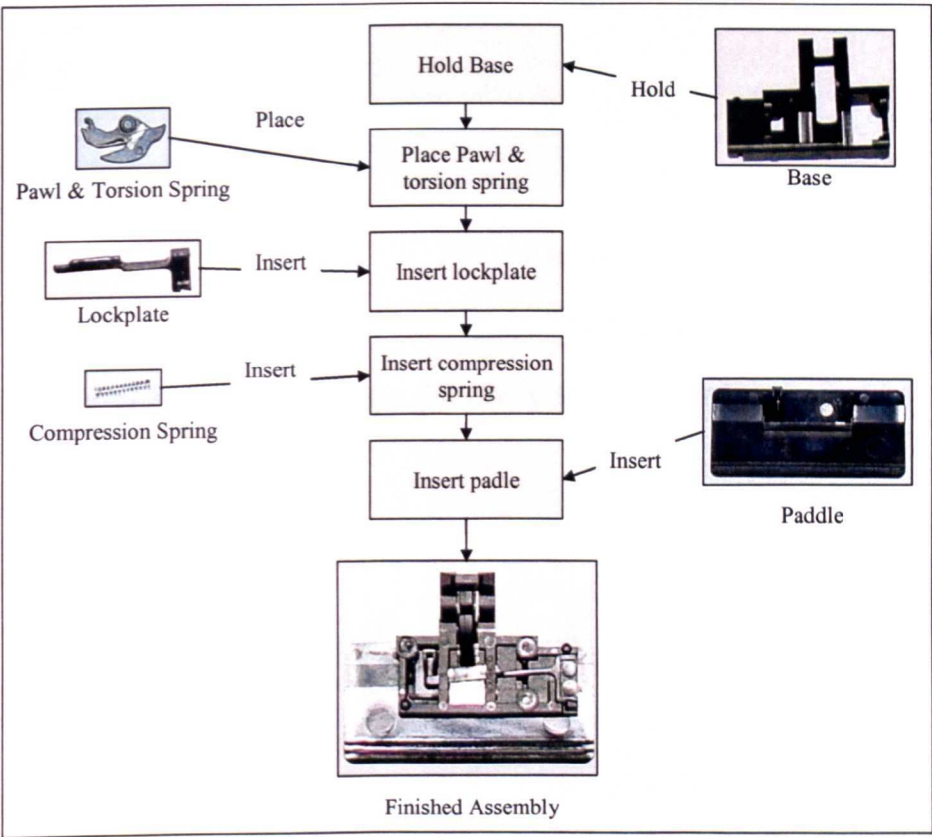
SOUTHCO GLOVE BOX LATCH ASSEMBLY
